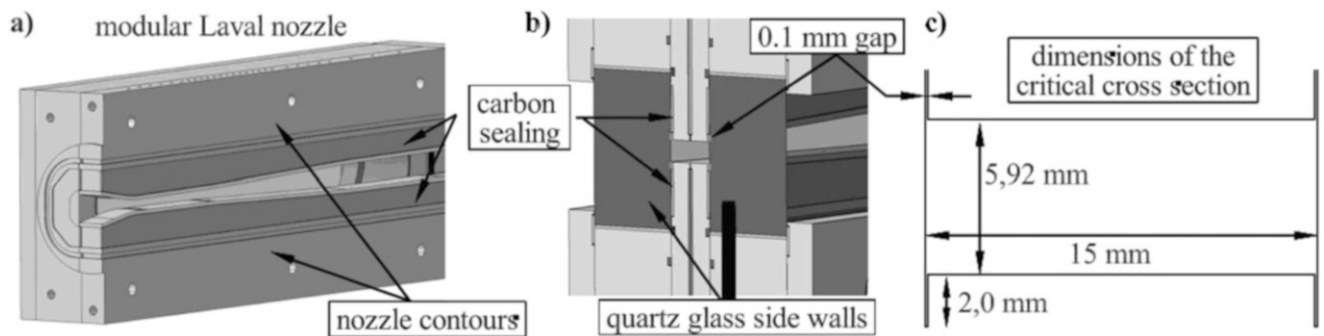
(a) Modular setting of the primary nozzle, (b) Cut view through the critical cross section, (c) Dimensions of the critical cross section with gaps
